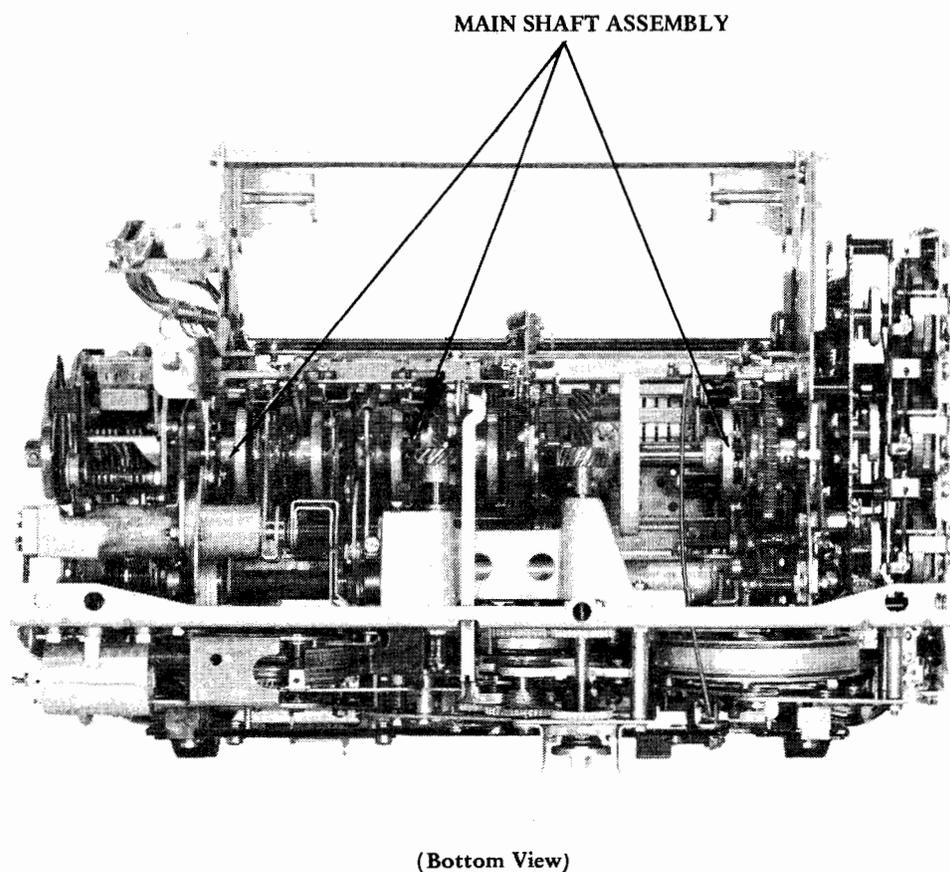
Main Shaft Assembly Mounted in Typing Unit
